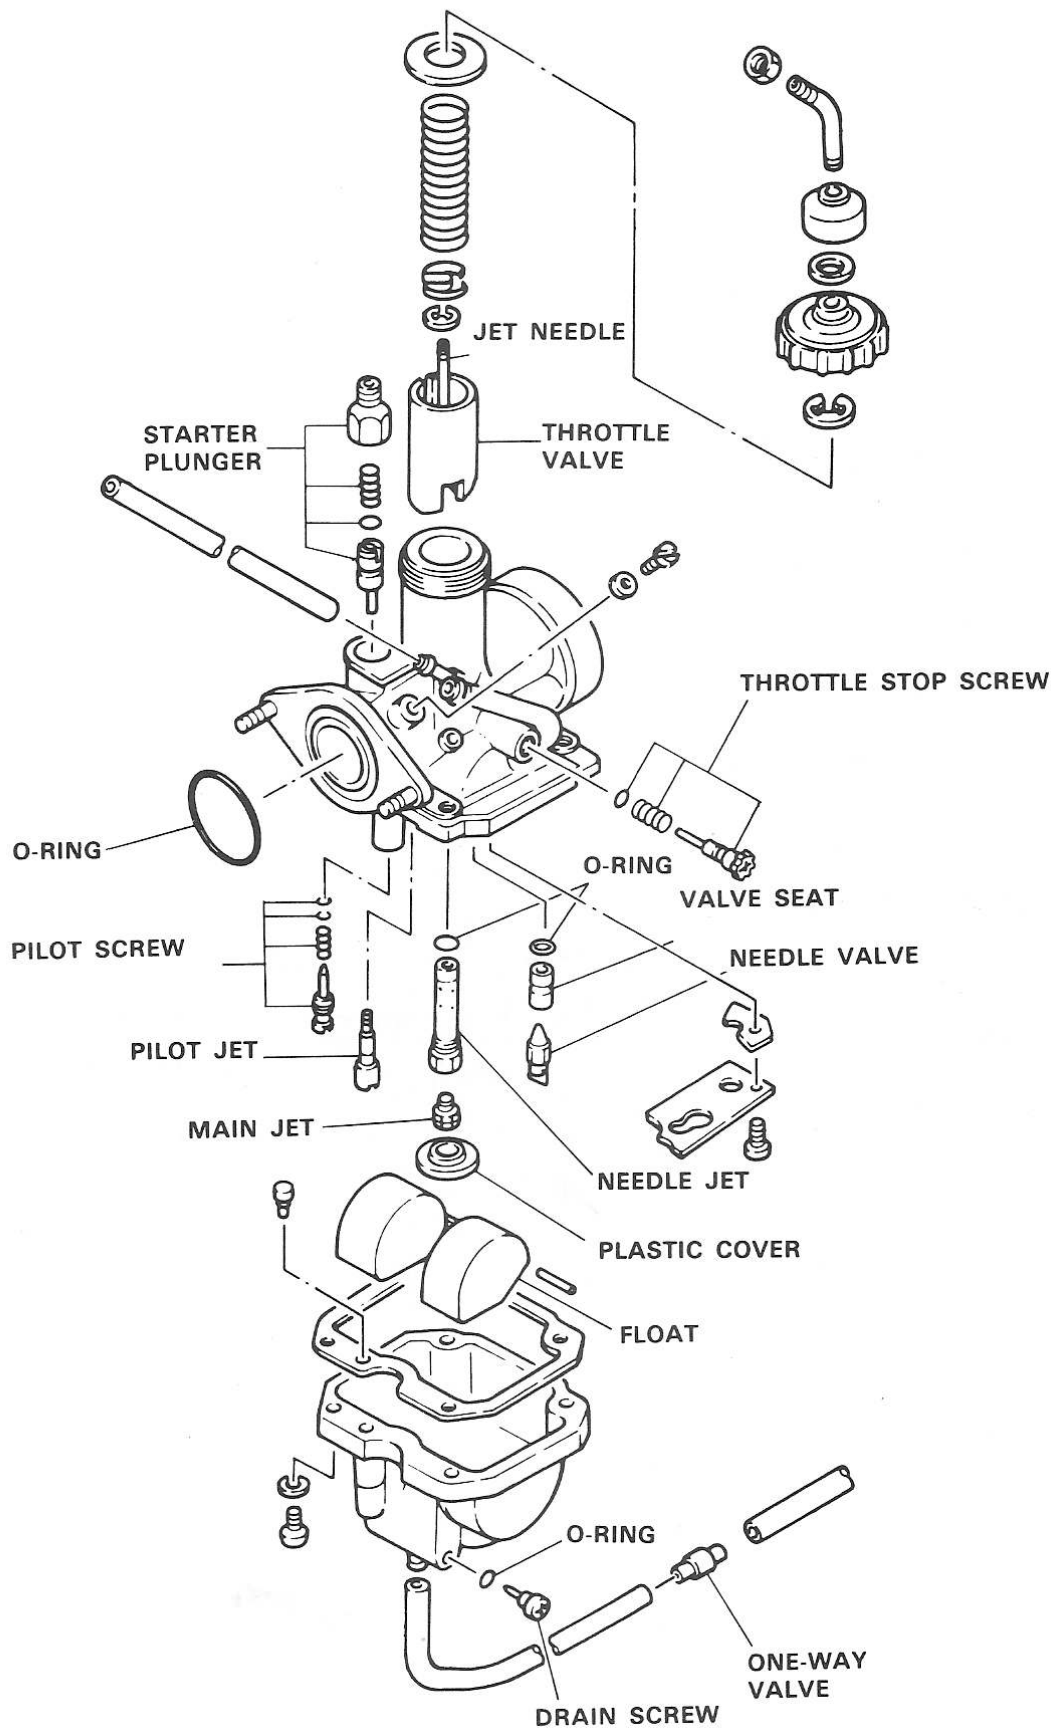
YTM 200 EK/EL/ERN, YTM 225 DXK/DXL, YFM 200 N carburetor components — exploded view (Sec 5)
